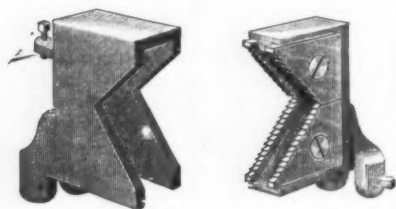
Pipe Attachment for Solid Machinist Vise.
